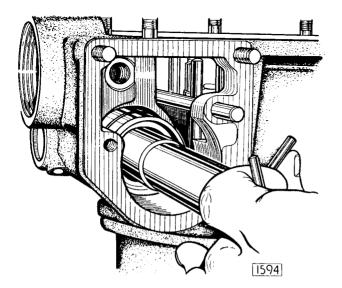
Extracting the accumulator piston housing. (Tool No. L.182).
